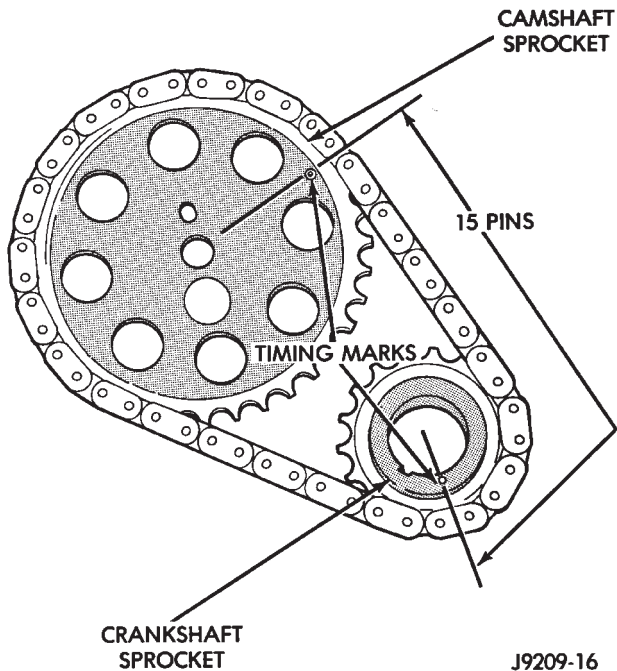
Verify Crankshaft—Camshaft Installation—Typical
